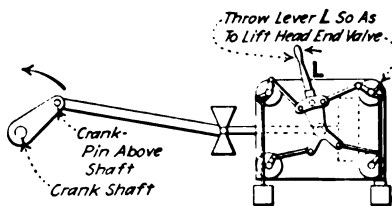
Showing how to start a Corliss engine running "over." (For engines with wrist plates of a construction different from that here shown it may be necessary to move the lever, *L*, in the opposite direction from that in which the piston is to move. But for the crank position shown in the above illustration, the head-end admission valve should, in every case, be lifted to start the engine running over, that is, in the direction indicated by the arrow.)
